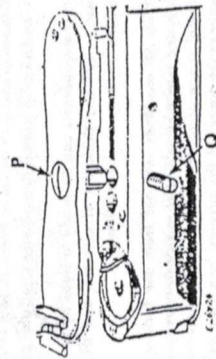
Correct Position of Hinge Pin in Needle Plate
